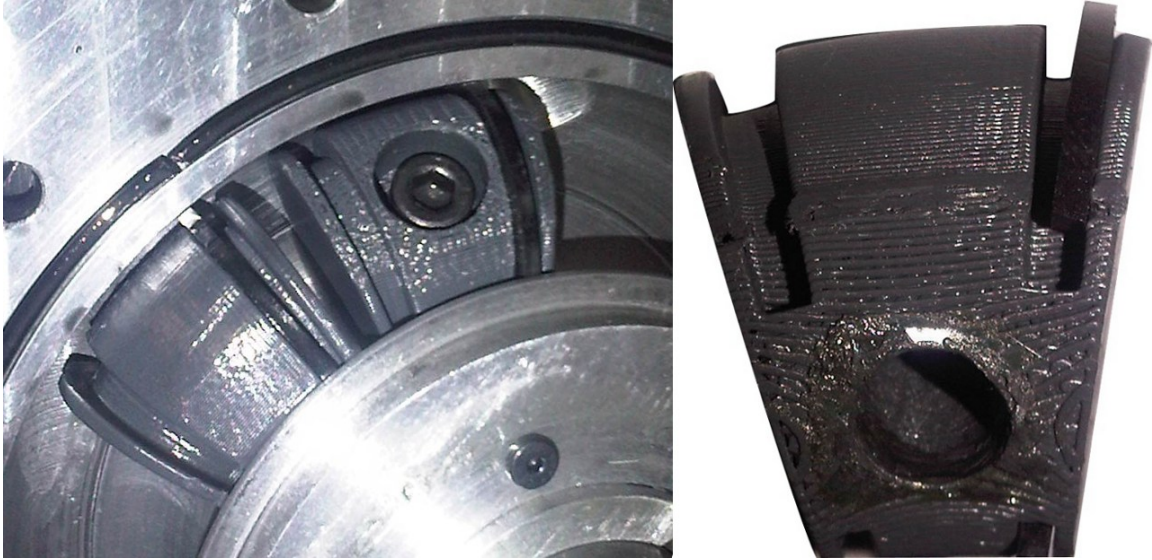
Toroidal piston with static seal on attached rotor, and piston ring seal on the sliding rotor.
